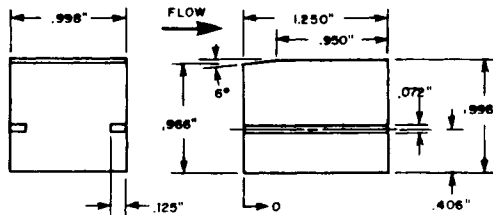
Detailed dimensions of material test section "B." Note that the nozzle geometry is rectangular (0.15 x 1.0 in.) and these segments insert into the nozzle configuration.
